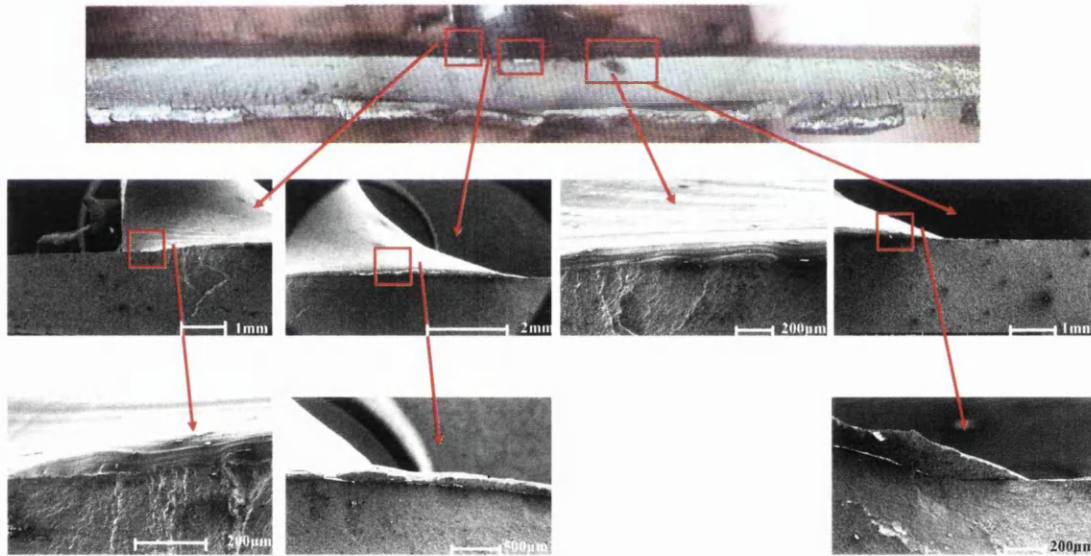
Typical Weld Throat Failure – Weld View, GM8
